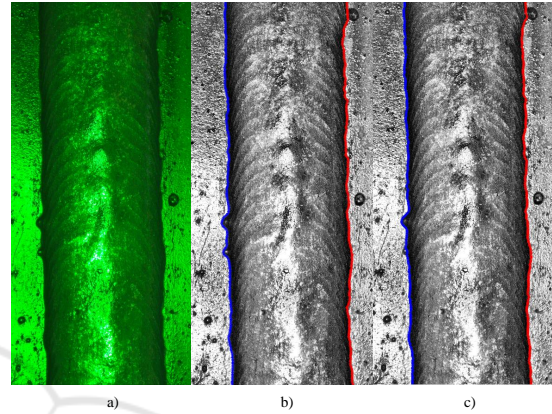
a) Weld bead Image. b) Manually highlighted edges. c) Proposed method highlighted edges.
